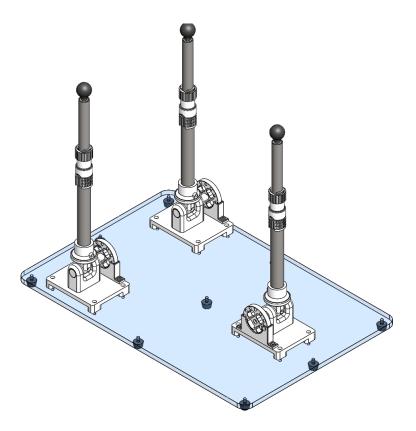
Fixture prototype V6.0 - Complete SolidWorks Model
